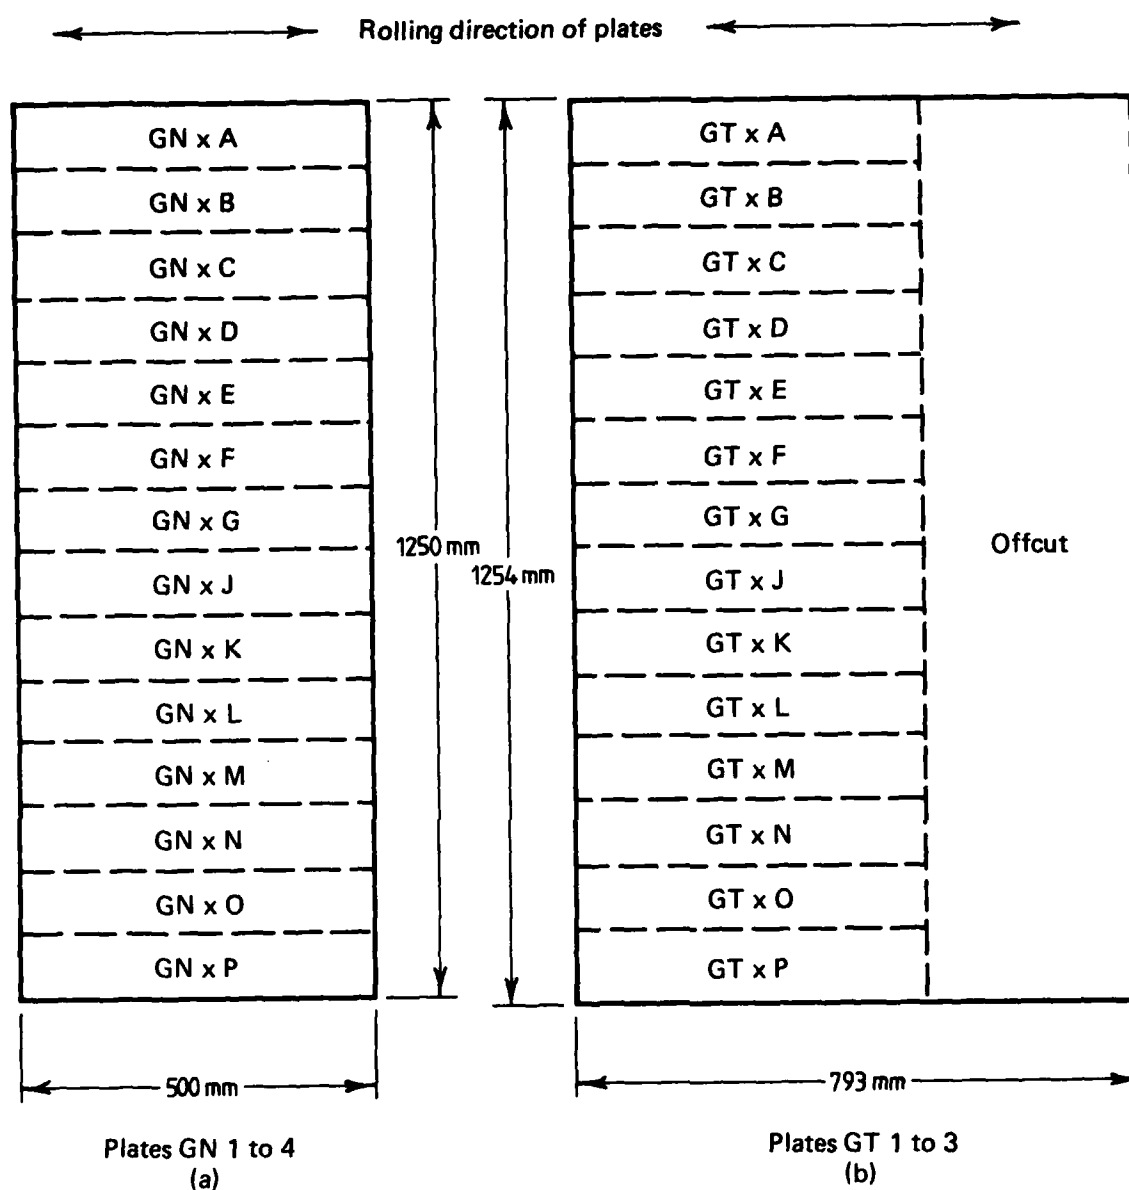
FATIGUE SPECIMEN POSITIONS IN A7-U4SG PLATE
